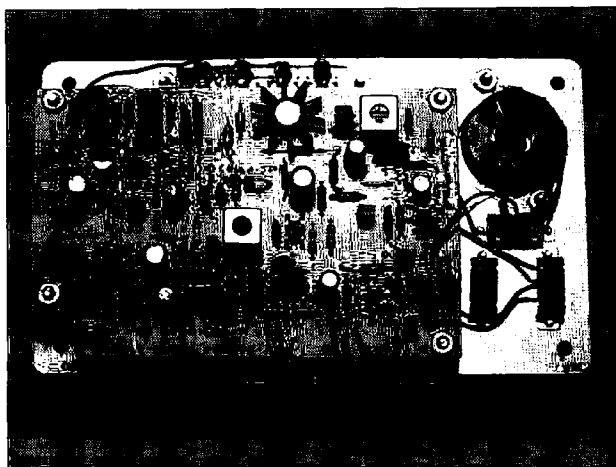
Photo B. Inside view of the SP-1. The PC board, switches and sockets are mounted directly to the bottom side of the project box metal cover.
